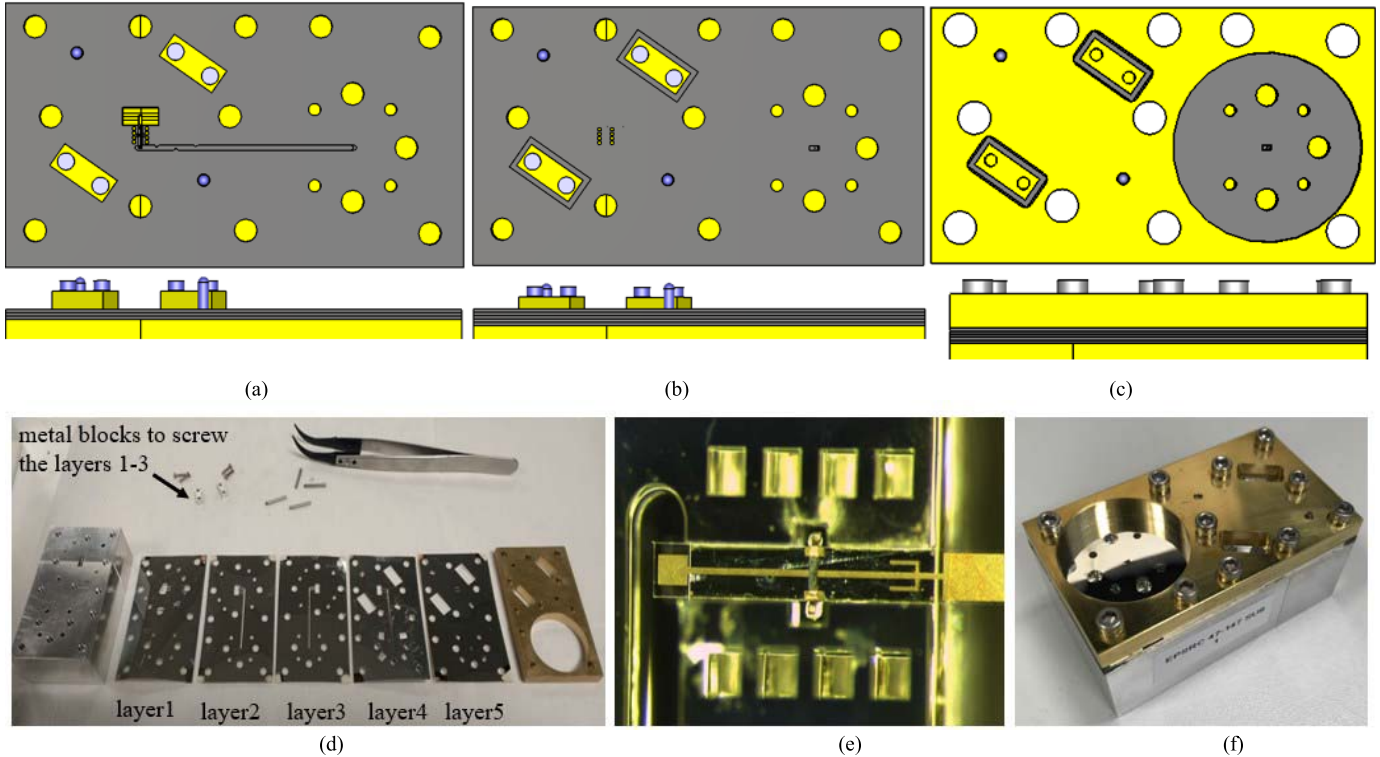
Tripler before and after assembly. (a)–(c) Assembly process. (d) and (e) Metal parts and SU-8 layers before assembly and tripler with the layers 1–3 and the quartz circuit assembled, respectively. (f) Tripler after assembly.
